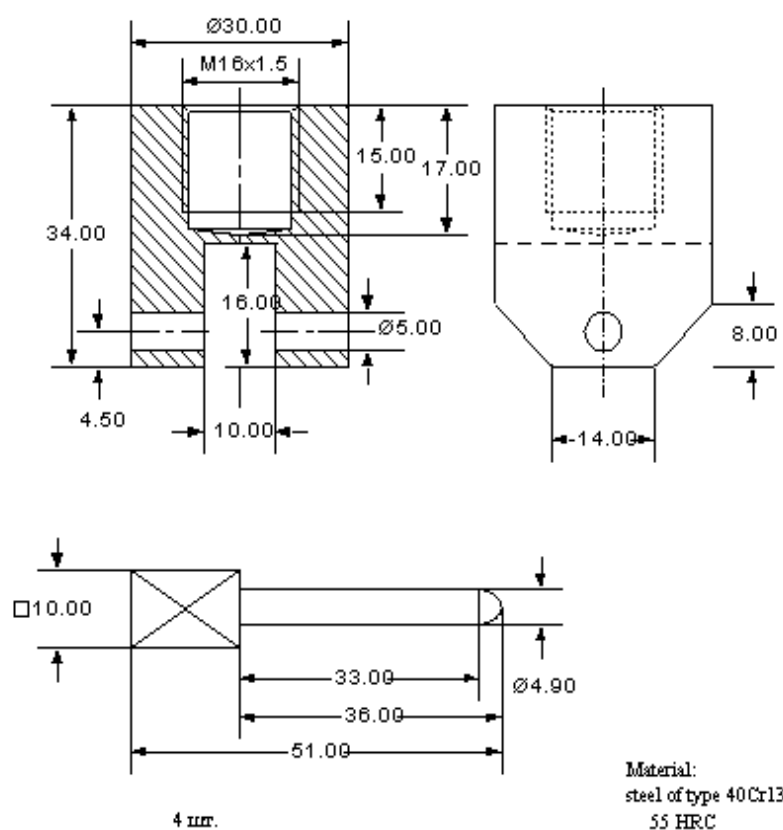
Grips and pins for performing the doubled longitudinal specimen tests
